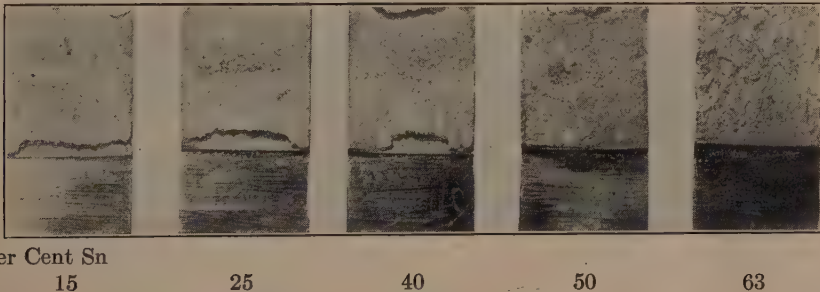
REPRESENTATIVE BRASS LAP-JOINT FRACTURES BY OPEN METHOD OF SOLDERING, SERIES A.
